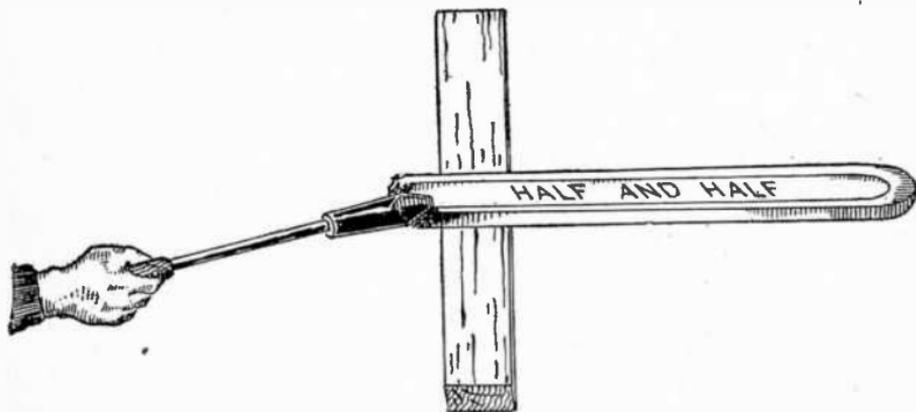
,207.—Picking up solder with a hot bit. This is the proper method for small work. Rest the bar of solder on some support as a brick or piece of wood and touch it with the end of the hot bit. Some of the solder will melt and remain on the bit. It is then transferred to the part to be soldered, and if the surfaces be in proper condition and fluxed when the bit touches the surfaces, the solder will leave the bit and cover the surfaces. *In picking up solder* from the stick, care should be taken not to leave the bit in contact with the solder too long or some of it will drop off. The larger the bit and area tinned, the more solder will the bit hold.
